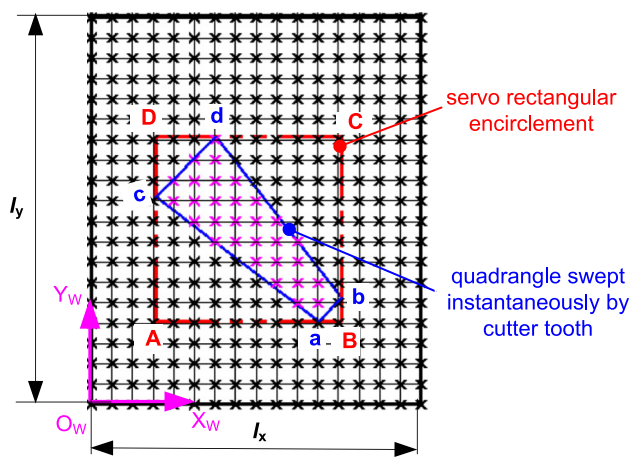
Part grid nodes showing cutter tooth encirclement and quadrangle swept by cutter tooth
